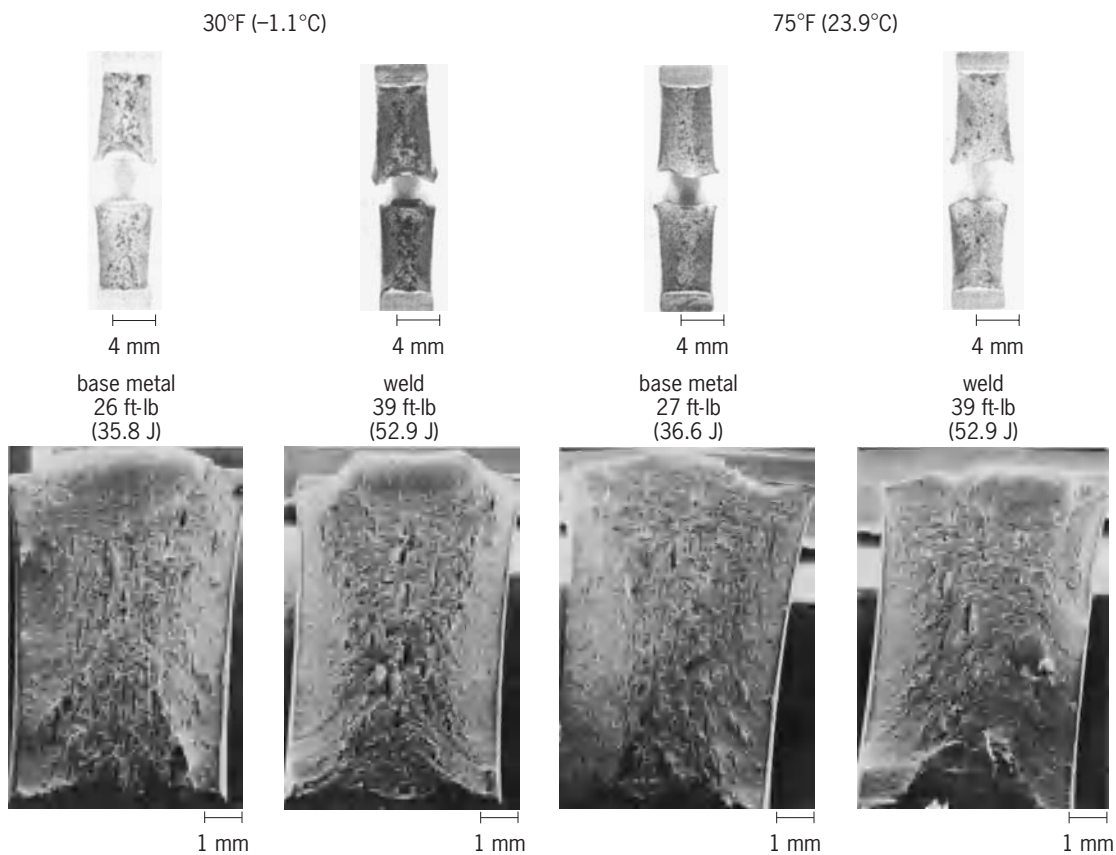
A change in the shape and distribution of the inclusions on the fracture surfaces of HY-130 weld and base metal impact specimens is shown. The top row comprises low-magnification macrophotographs of both halves of the fractured specimens. The bottom row comprises higher-magnification scanning electron micrographs of one-half of the fracture. Welds were made at 5 kW and a speed of 45 in./min (114 cm/min). (From E. M. Breinan and C. M. Banas, *Fusion zone purification during welding with high power CO<sub>2</sub> lasers*, *Proceedings of the 2d International Symposium of the Japan Welding Society, Osaka, August 24–28, 1975*)
